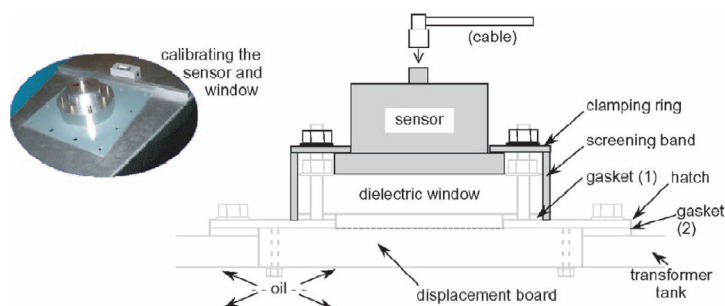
A UHF window retrofitted to a transformer inspection hatch [9]
